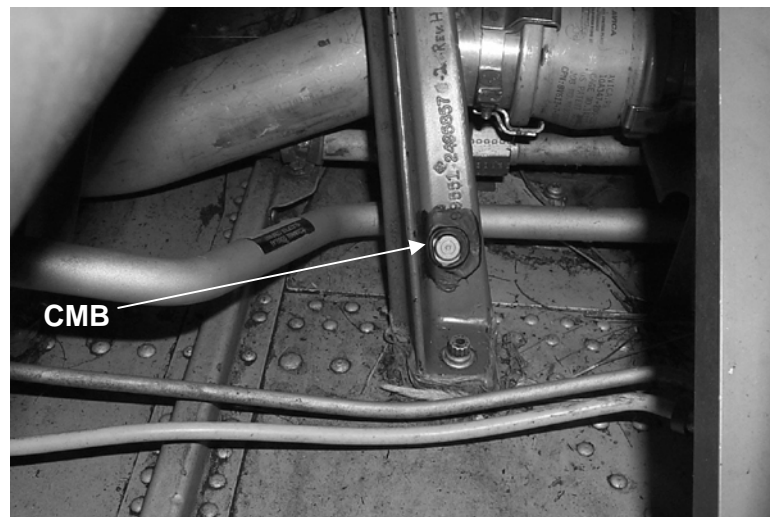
Forward Hanger Bearing (AH-64A/D) with CMB Installed
